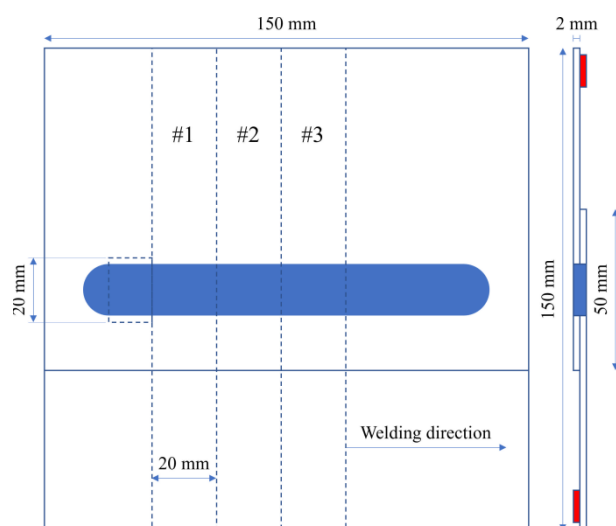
Sketch of the FSW seam and the shear tension sample. The shear tension and the metallographic samples are pointed out by the dotted lines in the welded coupons.
